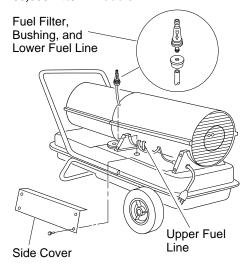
Fuel Filter Removal 115,000 Btu/Hr Model
